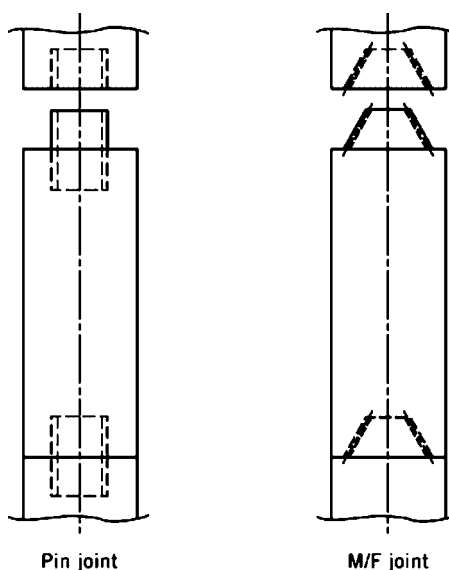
Prebaked electrode joints. Courtesy of UCAR Carbon Technology Corp.
